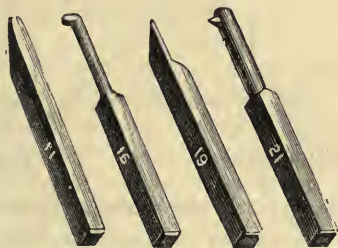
LATHE TOOLS FOR THREADING SCREWS.
